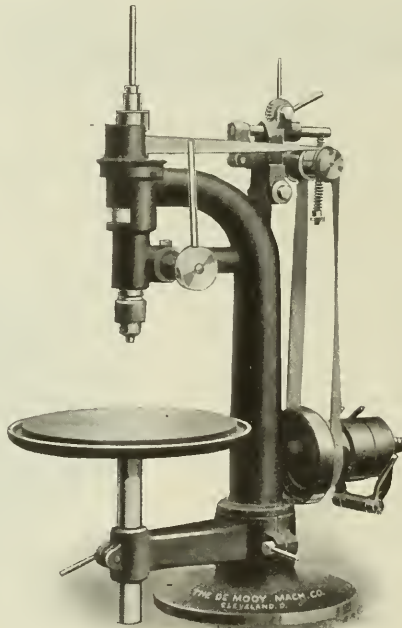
"Demco" No. 22 Bench Type of Ball Bearing Drilling Machine
